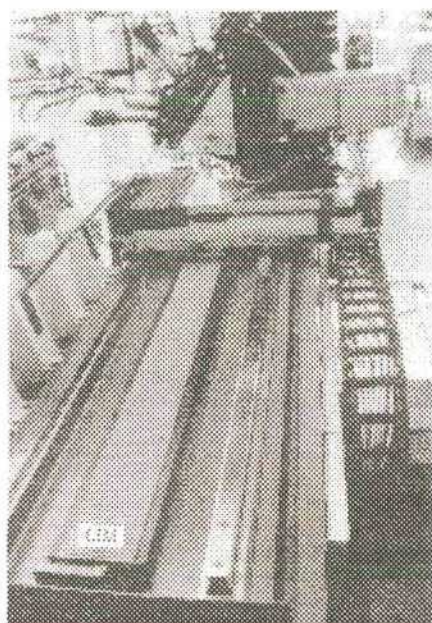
Machine tool with a single-sided LIM. [Gieras]
